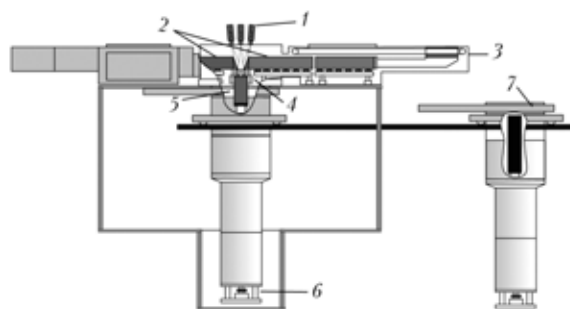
Diagram of VT01 equipment: 1) VTR electron beam gun; 2) remelting blanks; 3) the mechanism for feeding the blanks; 4) the water-cooled solidification mould; 5) the billets; 6) the withdrawal mechanism; 7) the vacuum gate.
